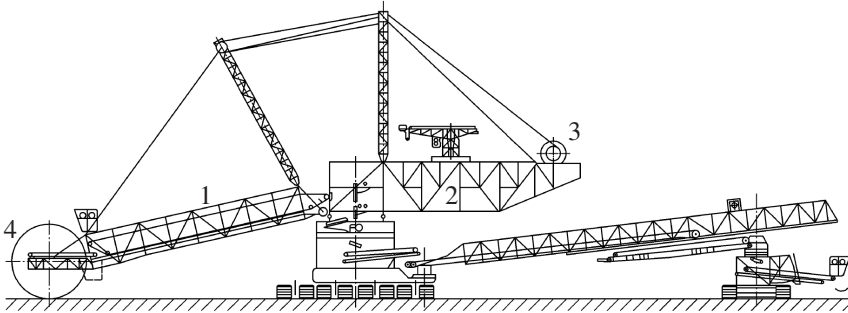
Schematic drawing of the bucket wheel excavator RBW 262 [39, p. 112]
